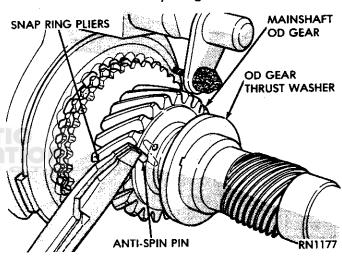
Removing/Installing Thrust Washer And Anti-Spin Pin
